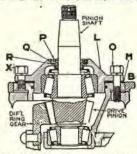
Timken Model 5014, rear-axle drive pinion adjustment. Note oil seal (Q). Adjustment of bearings, by removing shims (M); adjustment of mesh of drive pinion and ring gear, by turning (B).
